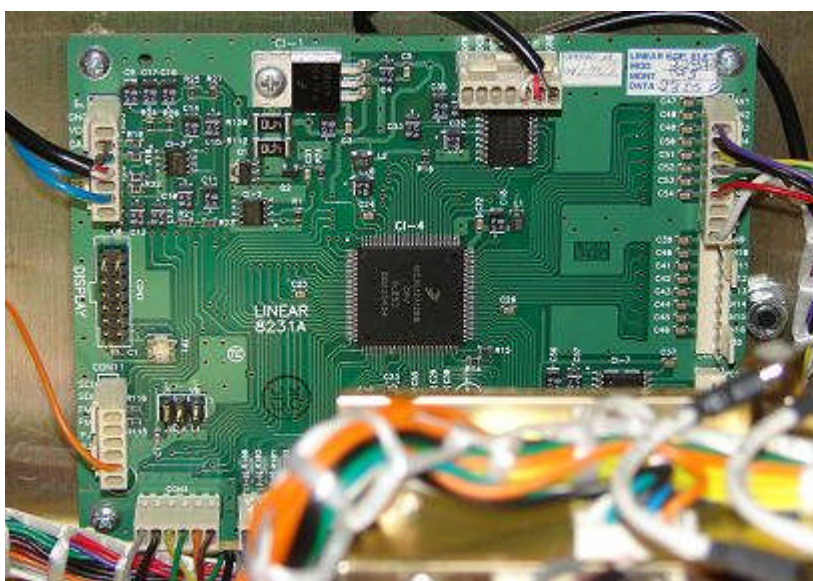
SCU assembled at the exciter drawer GV4456 – module 4456
